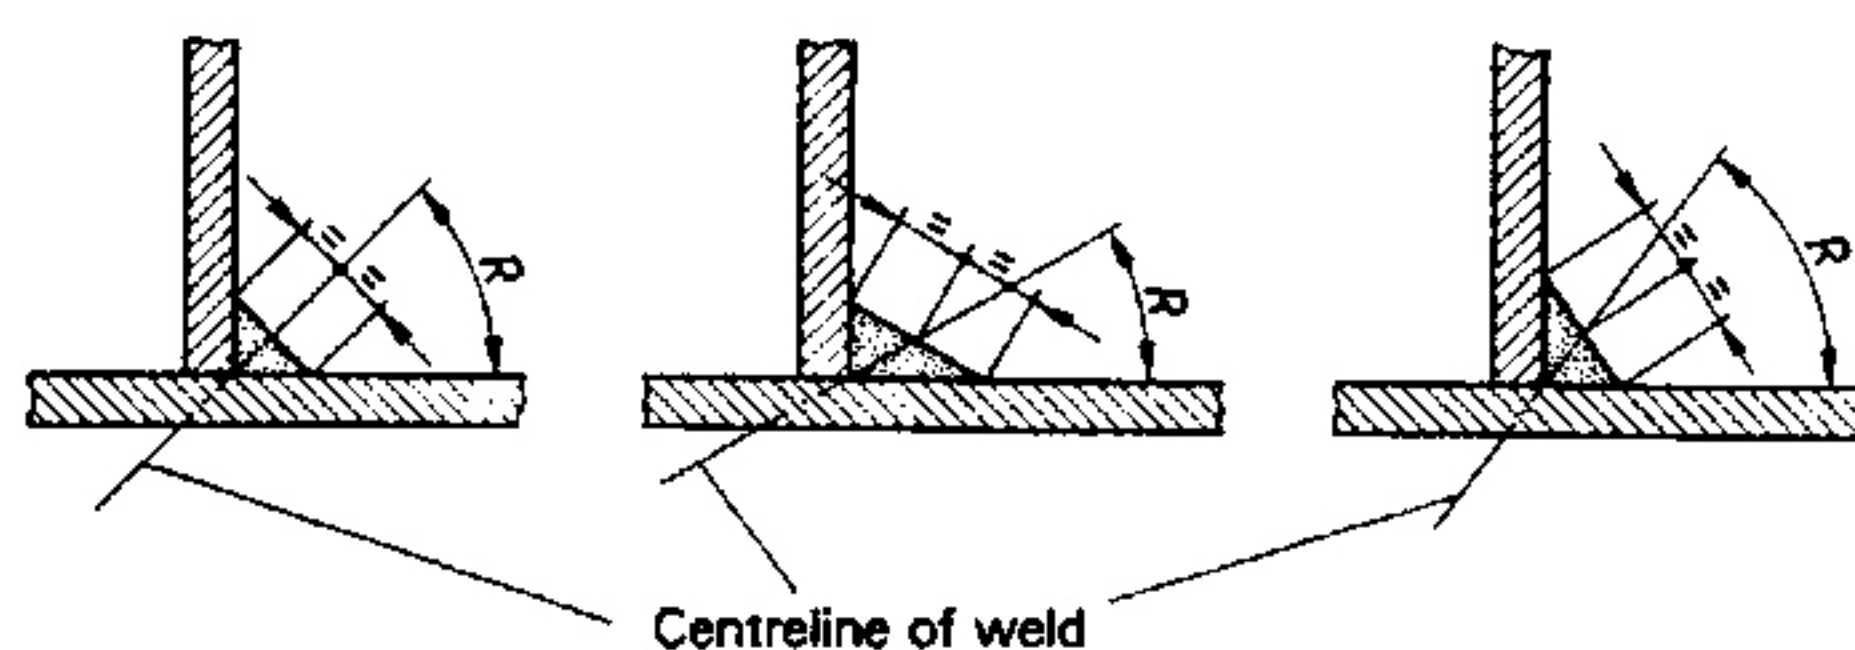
Examples of rotation, R , of symmetrical and asymmetrical fillet welds
